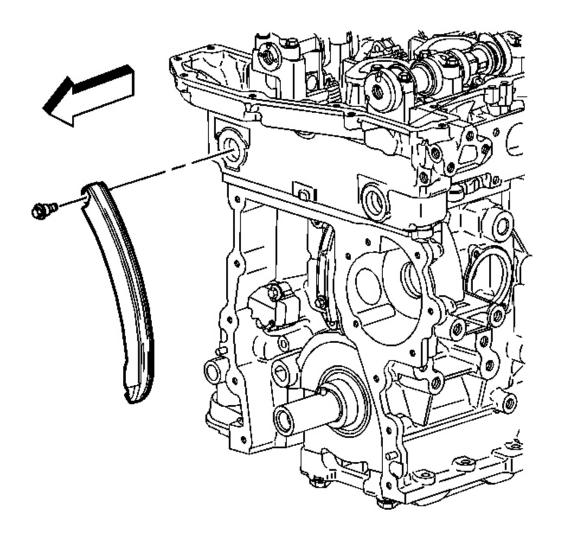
View Of Timing Chain Tensioner Shoe & Bolt Courtesy of GENERAL MOTORS CORP.
